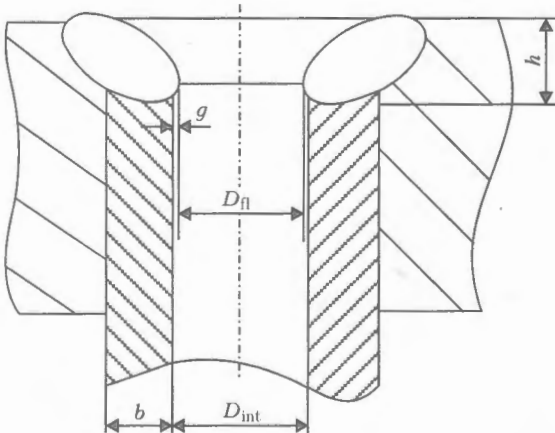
Diagram of the welded tube to tube plate joint: h — height of net section of weld; g — value of weld roll; b — tube wall thickness; D_{int} — internal diameter of tube; D_n — diameter of flow section of tube
